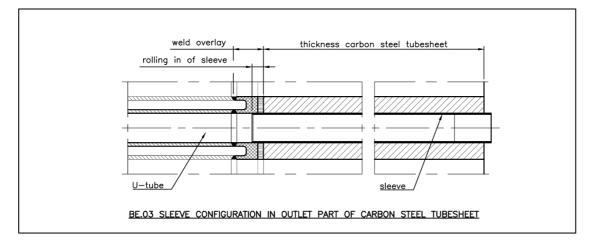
In-situ installation of duplex sleeves (BE.03) to protect the tube sheet holes from erosion-corrosion
